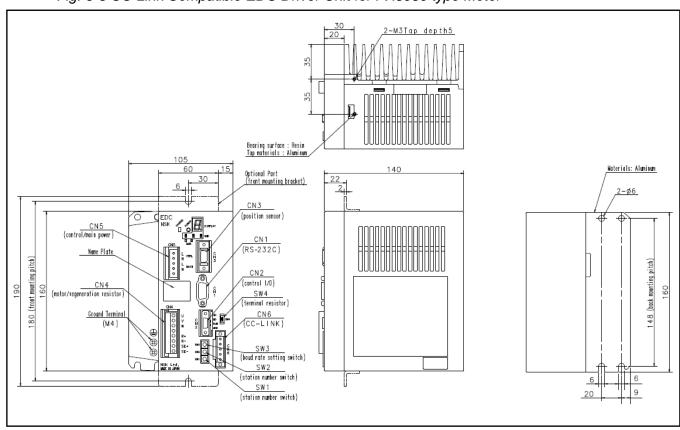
CC-Link Compatible EDC Driver Unit for PX3050 type Motor
